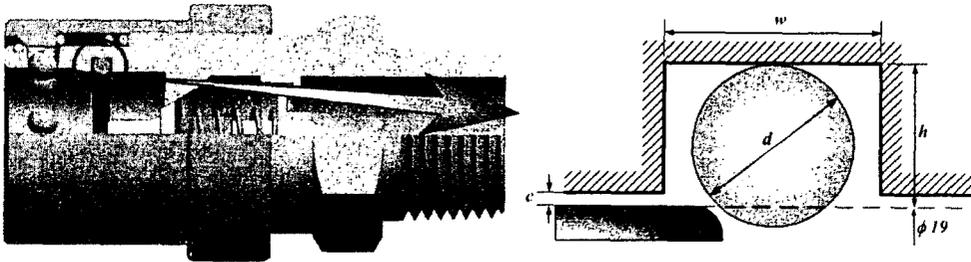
Design parameters for optimized O-ring groove using taguchi method
